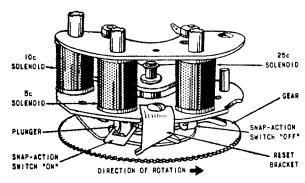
CREDIT SOLENOID & SWITCH ASSEMBLY.
